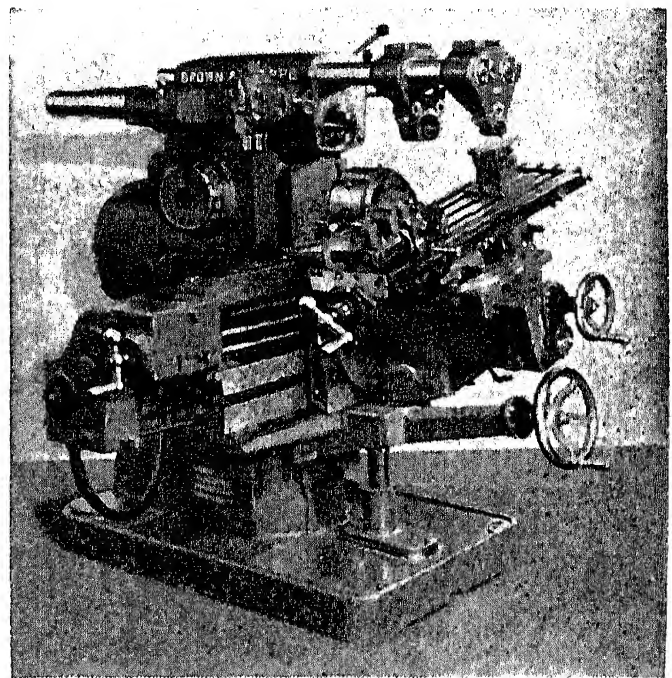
A No. 0 omniversal milling machine. (Courtesy Brown and Sharpe Mfg. Co.)
